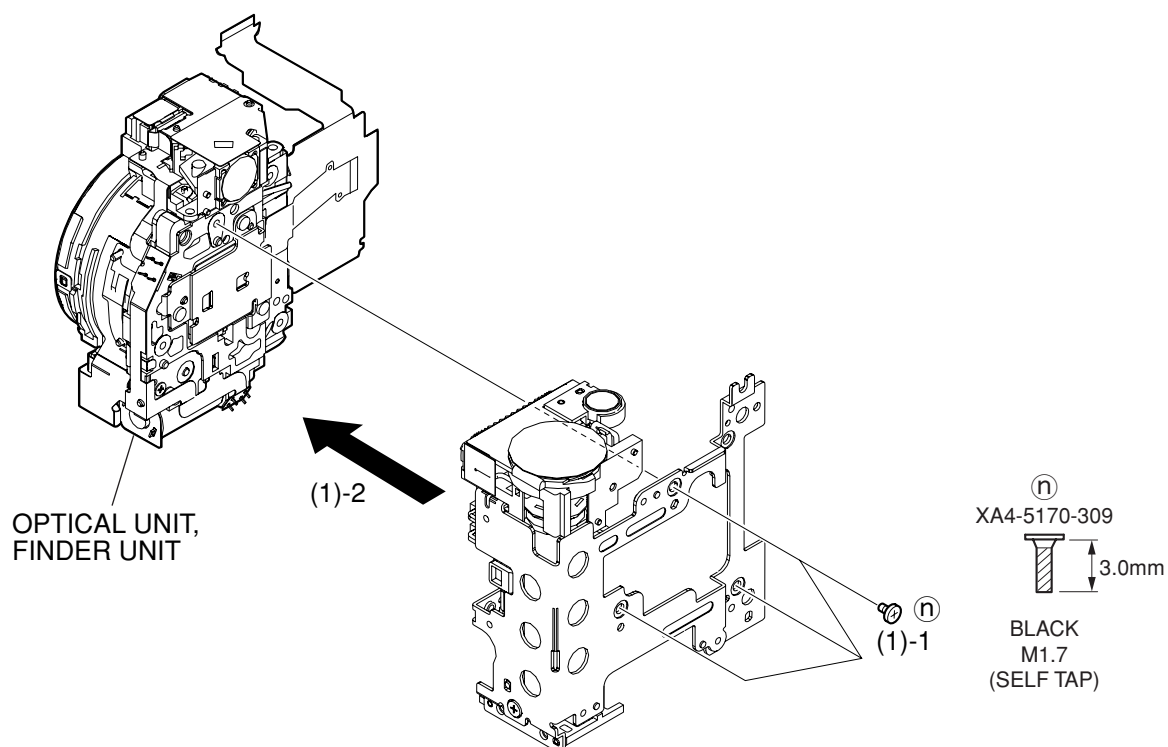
OPTICAL UNIT, FINDER UNIT - (1)
